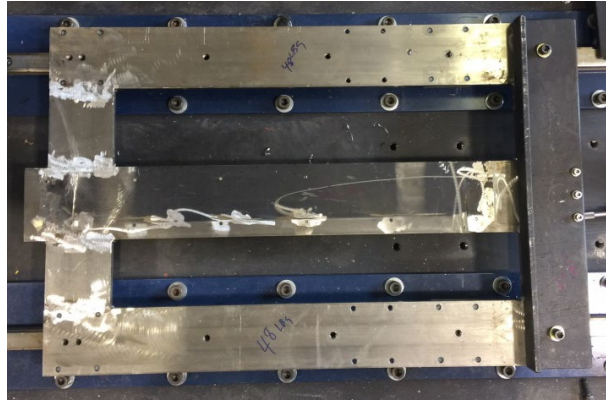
Bearing Mount Plate Assembly with Bench Base Mtg. Angle
